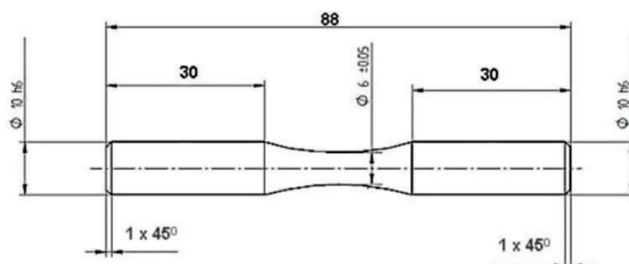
Dimensional drawing of the fatigue specimen in accordance with the ASTM E466 [14].
